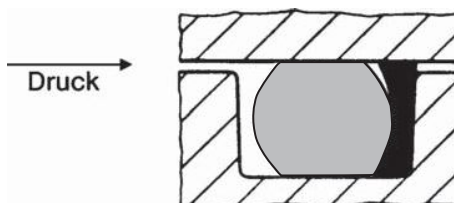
A back-up ring placed on the pressure side of the O-ring resists the O-ring entering into the clearance gap
